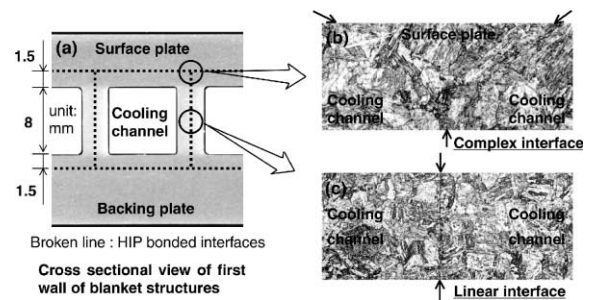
A typical cross sectional view of first wall of blanket structure fabricated by HIP-bonding and an aspect of a typical HIP-bonding region: (a) shows a cross sectional view of the blanket, (b) shows a complex interface composed of a surface plate and cooling channels, (c) shows a linear interface composed of the cooling channels. Sufficient bonding without any defects is seen in these interfaces.
